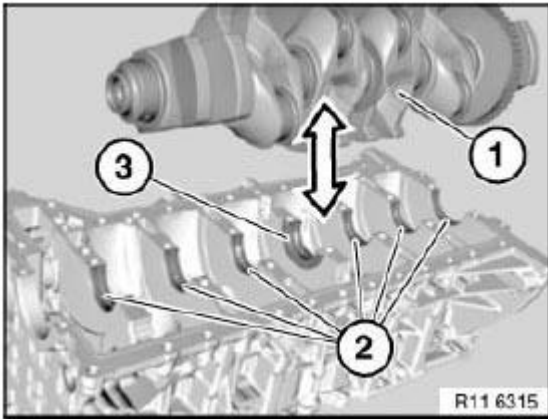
Identifying Crankshaft And Main Bearing Shells
